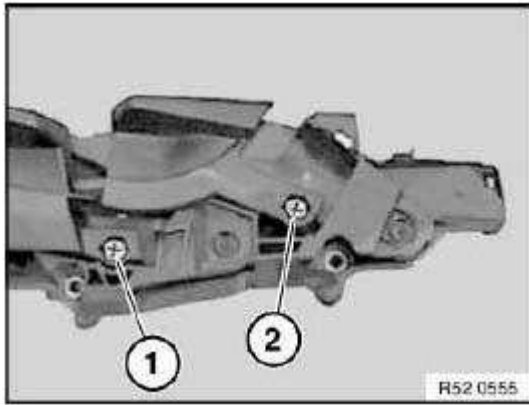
Adjusting Screws And Eccentric Disks (Actuating Unit Version C
